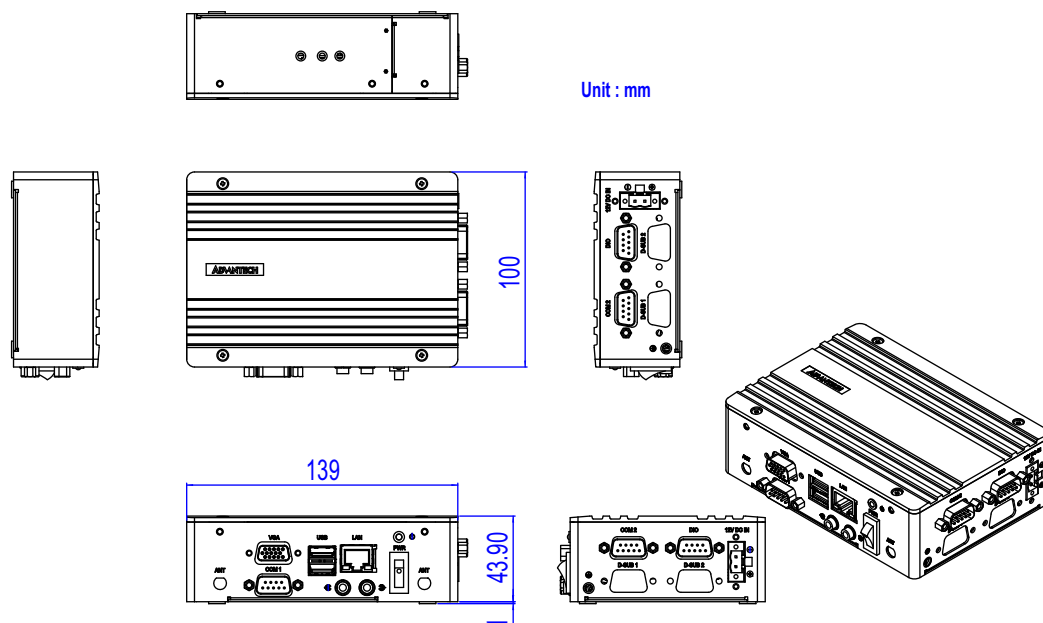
EPC-S201 Mechanical Dimension Drawing
